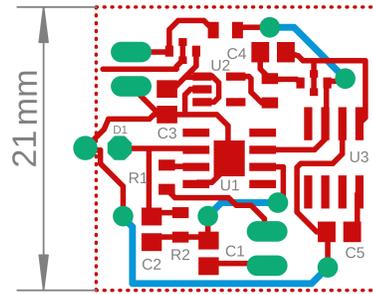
PCB layout (top view): top layer in red, bottom layer in blue, pads and vias in green.
